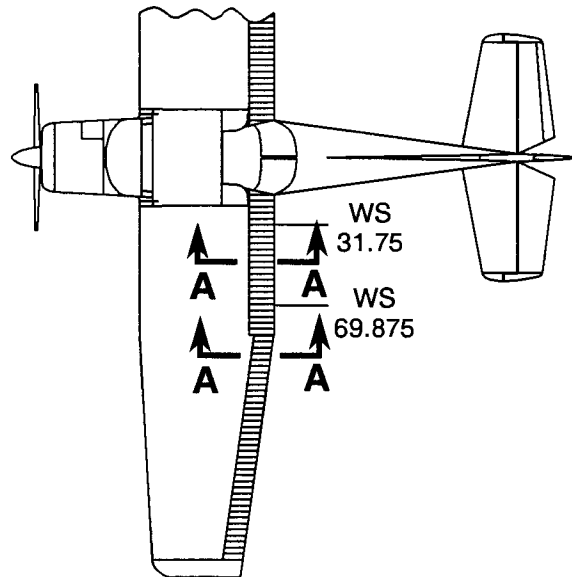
Flap Support Rib Assembly and Roller Bearing Replacement (Sheet 3)
